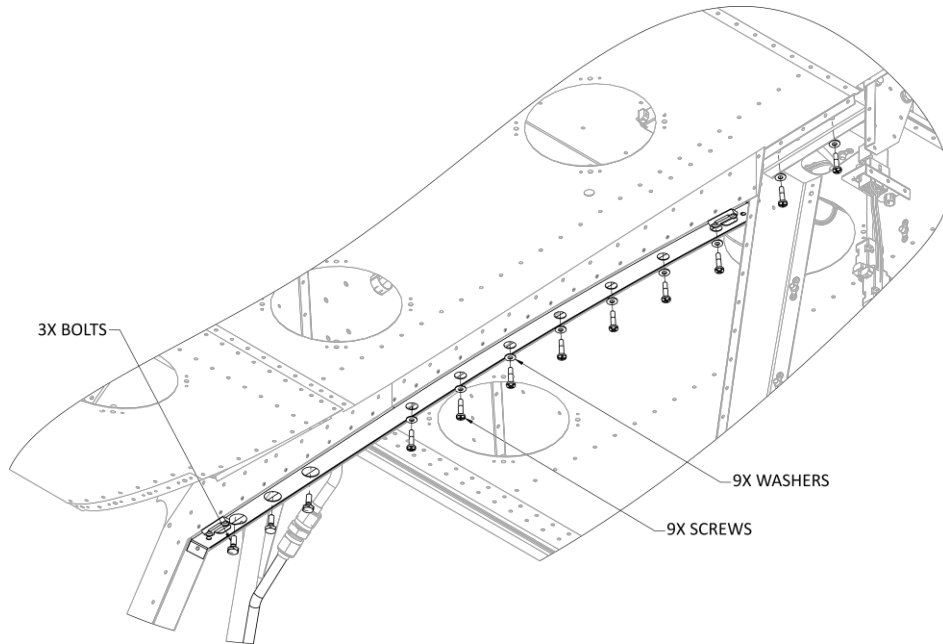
Door frame screw removal. Use same procedure for passenger-side bolts.
